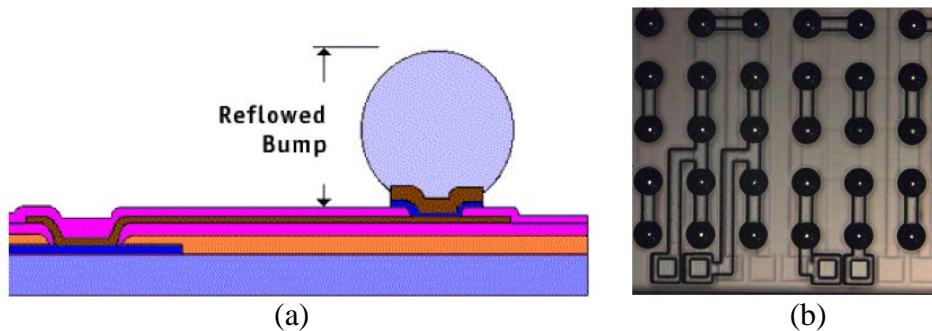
Bond Pad Redistribution Layers (RDL): (a) Polyimide dielectric layer is deposited and patterned to open bond pads while sealing fuse openings. Conductive metal layer connects old bond pads to new pad locations. The second layer of polyimide protects the metal trace. New bond pad location is opened for solder bumps reflow. (b) Optical image of old bond pads patterned with RDL and solder bumps. [6]
